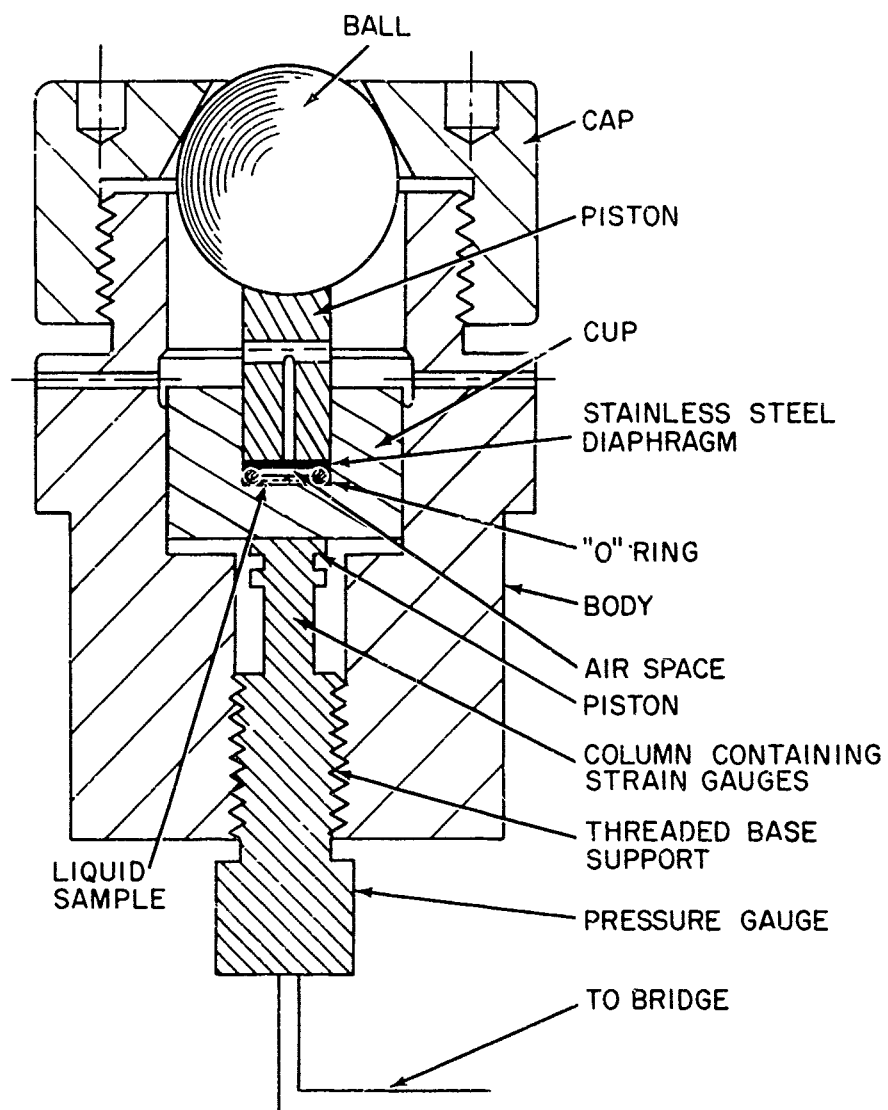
DETAILS OF SAMPLE CUP ASSEMBLY CONTAINING
